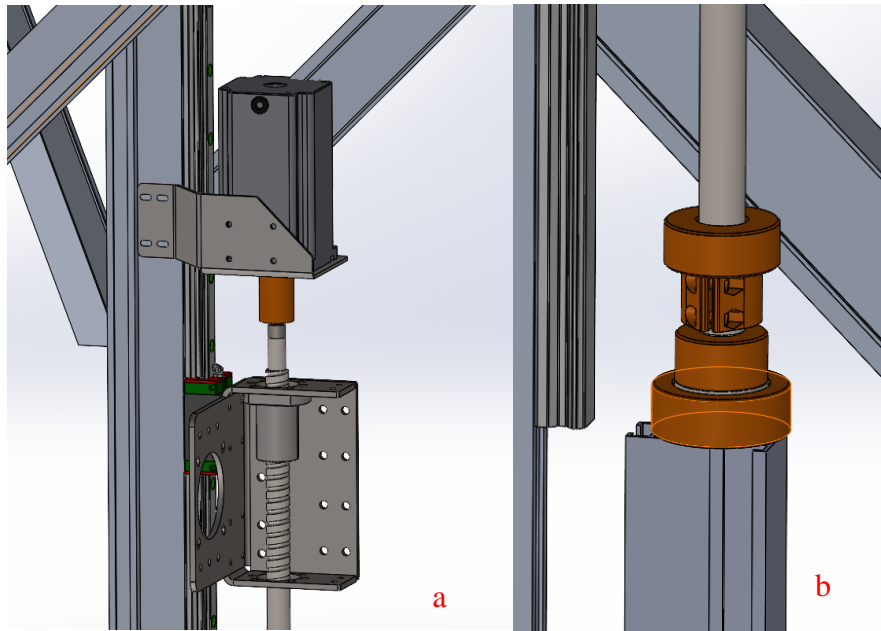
A- Single Z-axis top motor corner and B- lifted ball screw end
